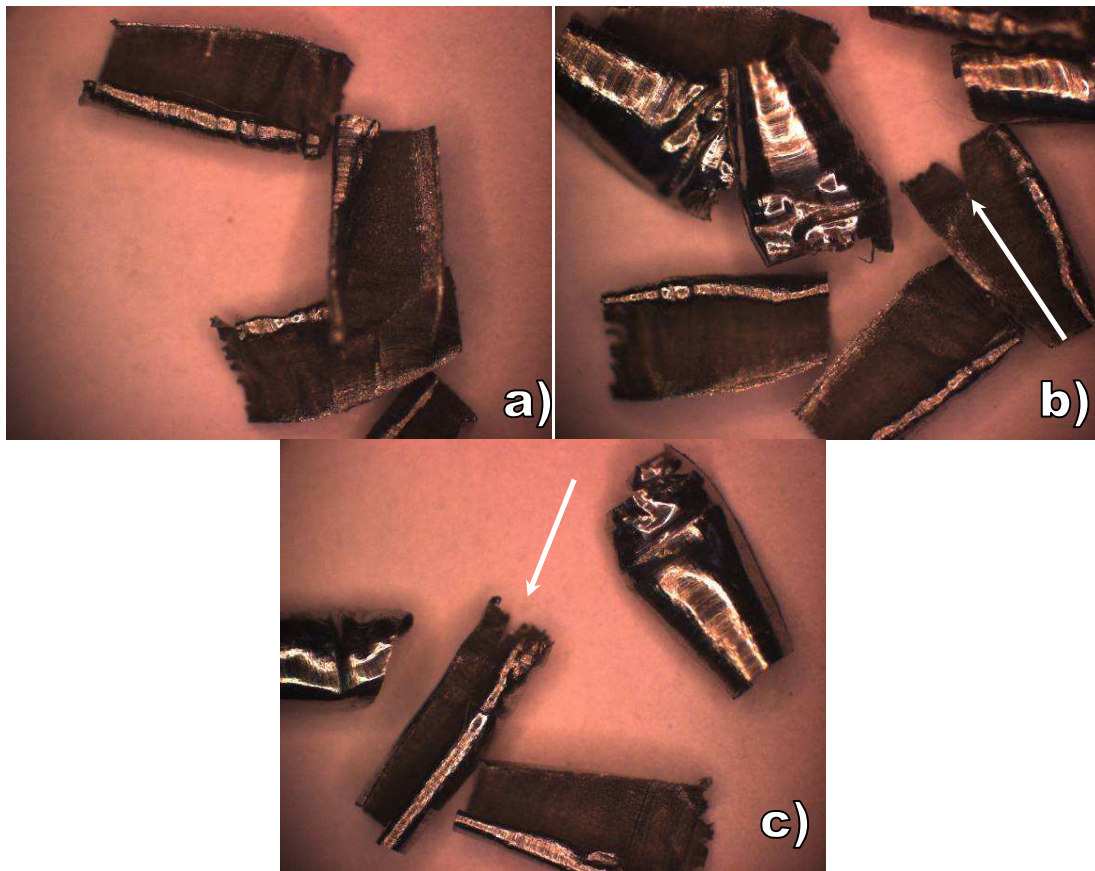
The chips collected for the a) flood lubrication, b) 40 bar through spindle lubrication and c) 80 bar through spindle lubrication (x50).
